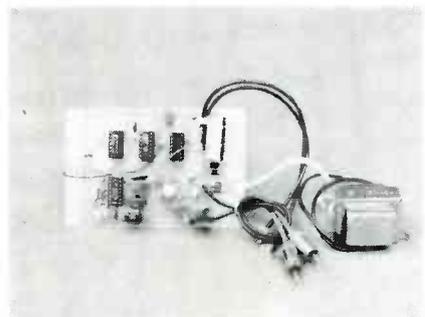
SHOWN HERE is the completely assembled PC board. Note that this board contains all of the components.
